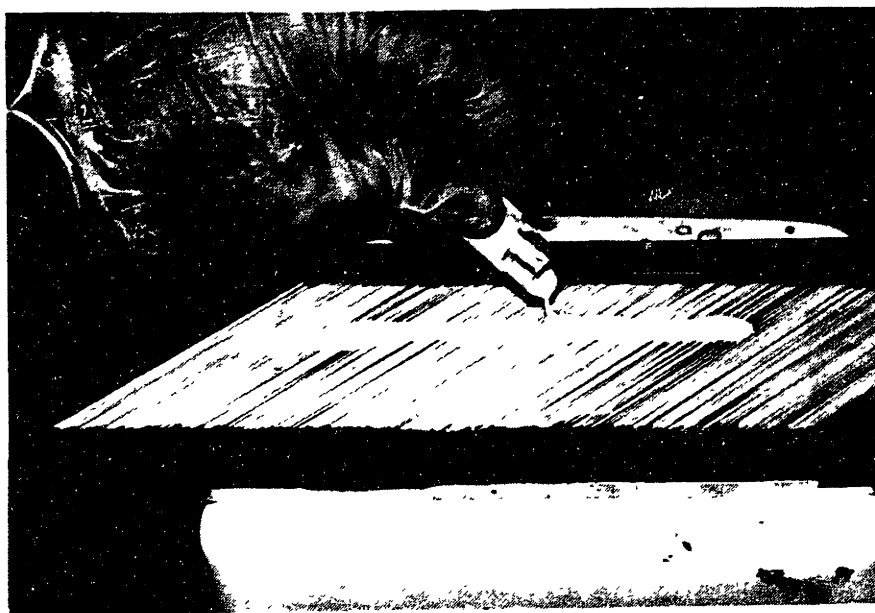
Matrix material being added to mold assembly containing fibers.
